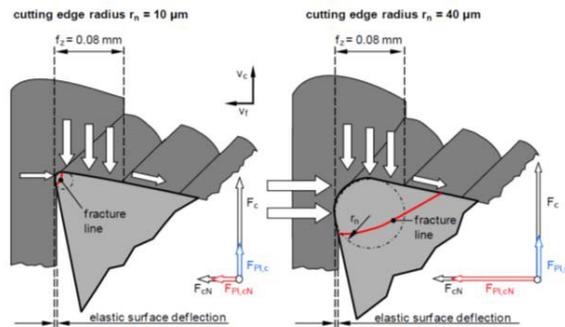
Tool load on the cutting edge with elastic surface deflection with cutting edge radius r_n (a) 10 μ m; (b) 40 μ m [8].
